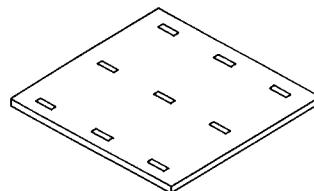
Metal mask for depositing emitter and base stripes.
